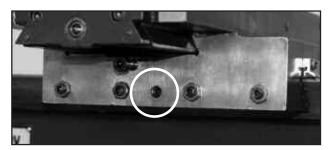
Granite Carriage Lock X-Axis (Rear View)
